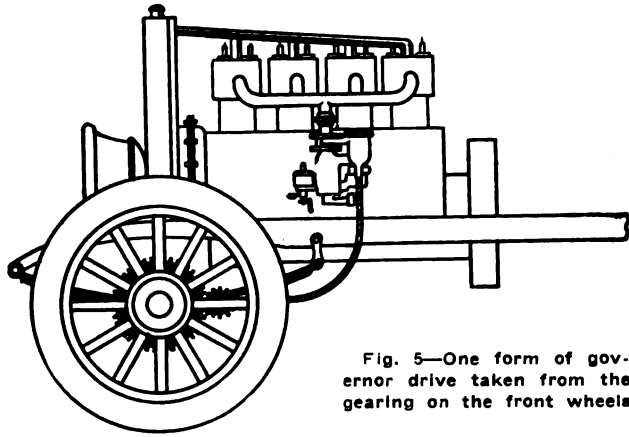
One form of governor drive taken from the gearing on the front wheels
